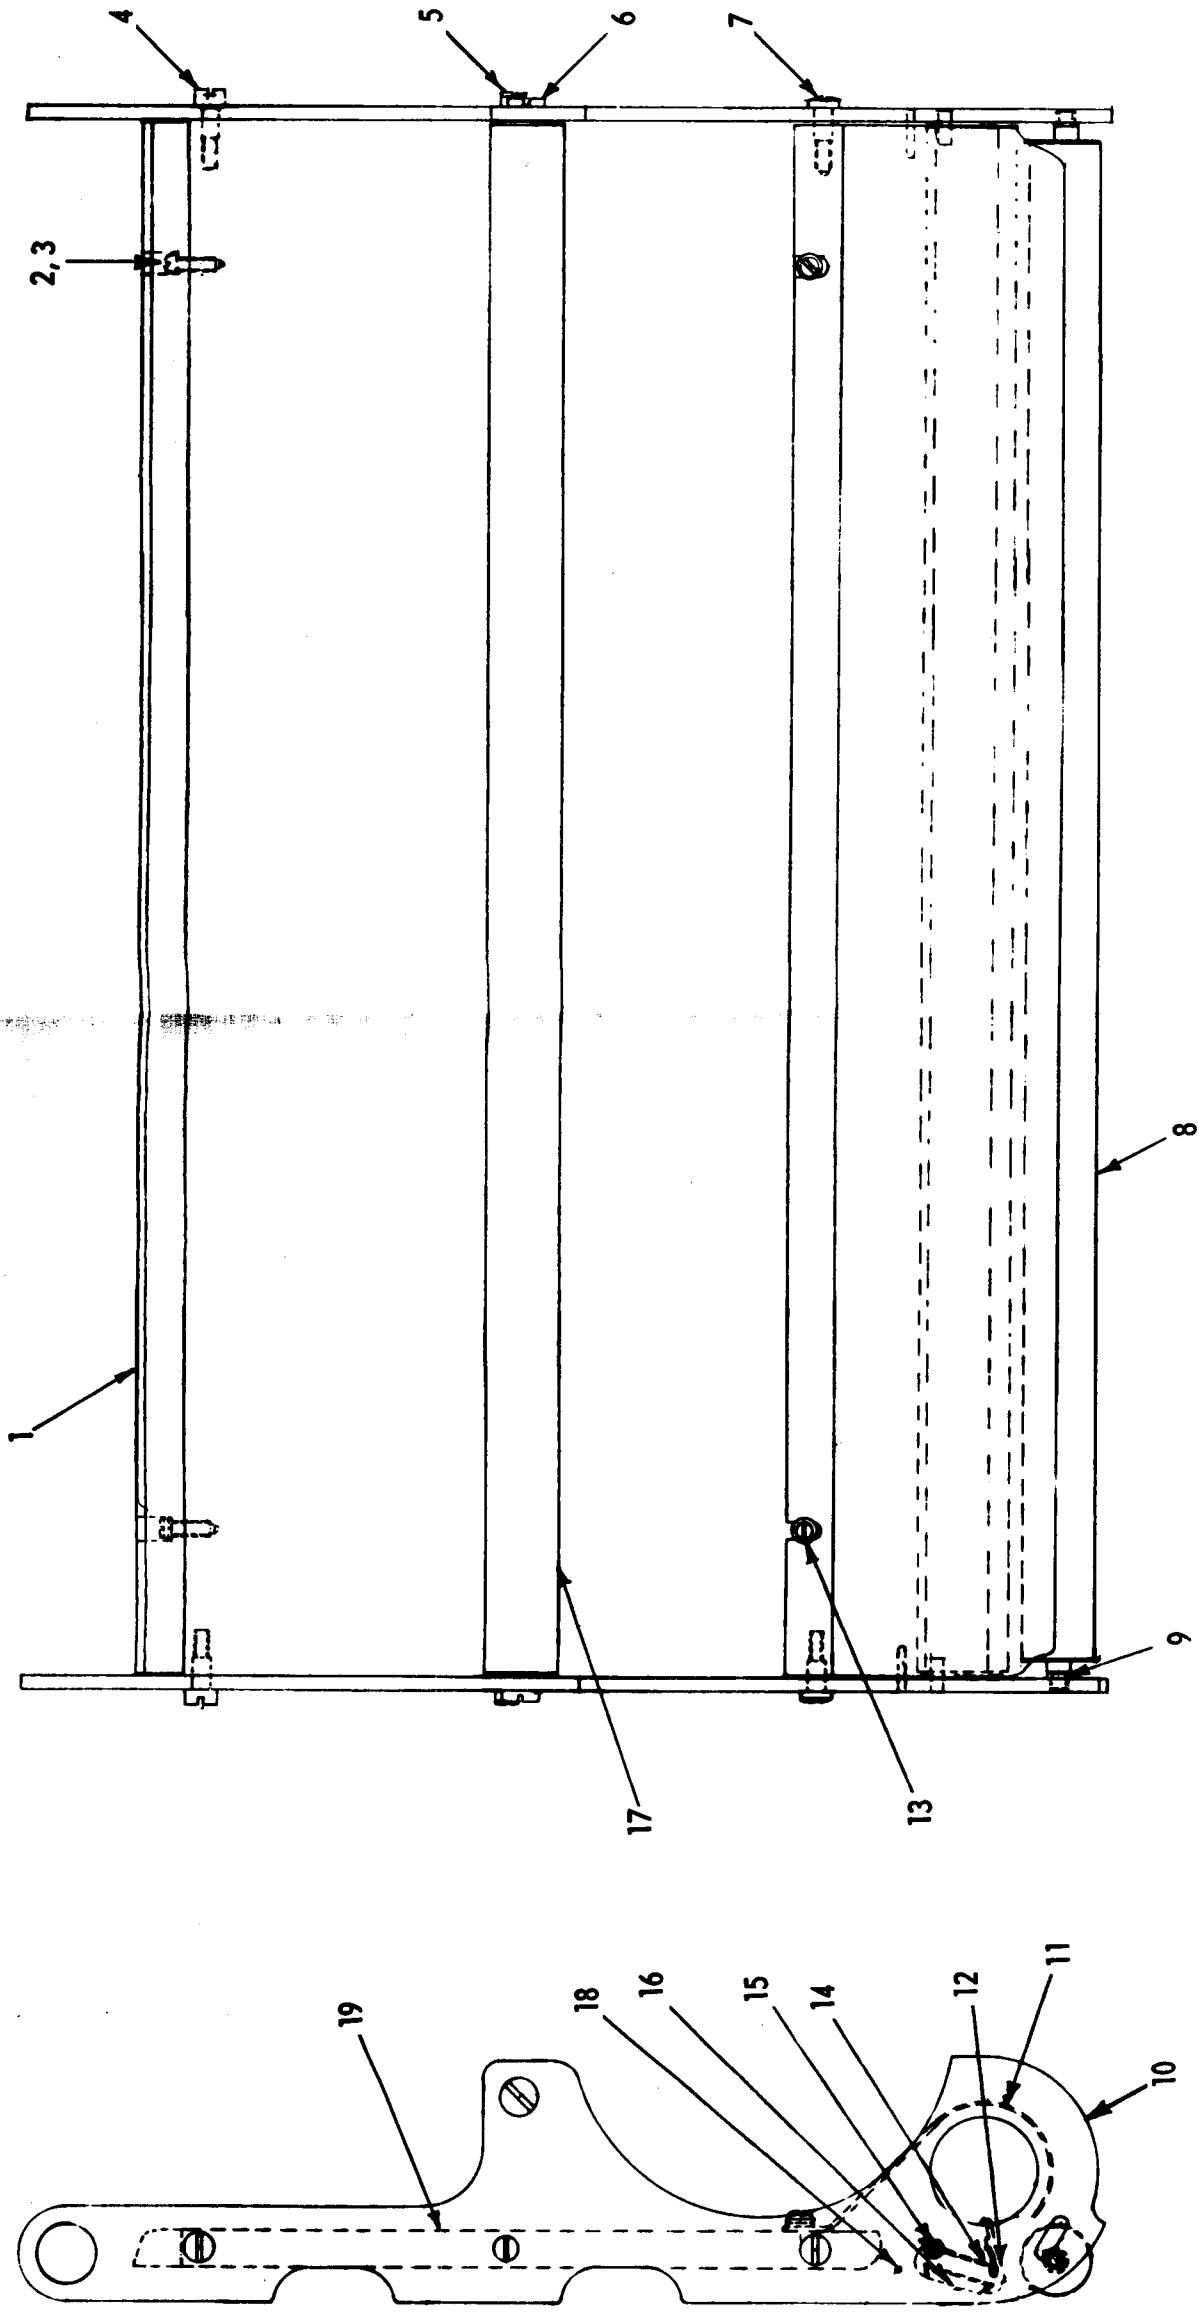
PLATEN TABLE ASSEMBLY 358-100-C24
